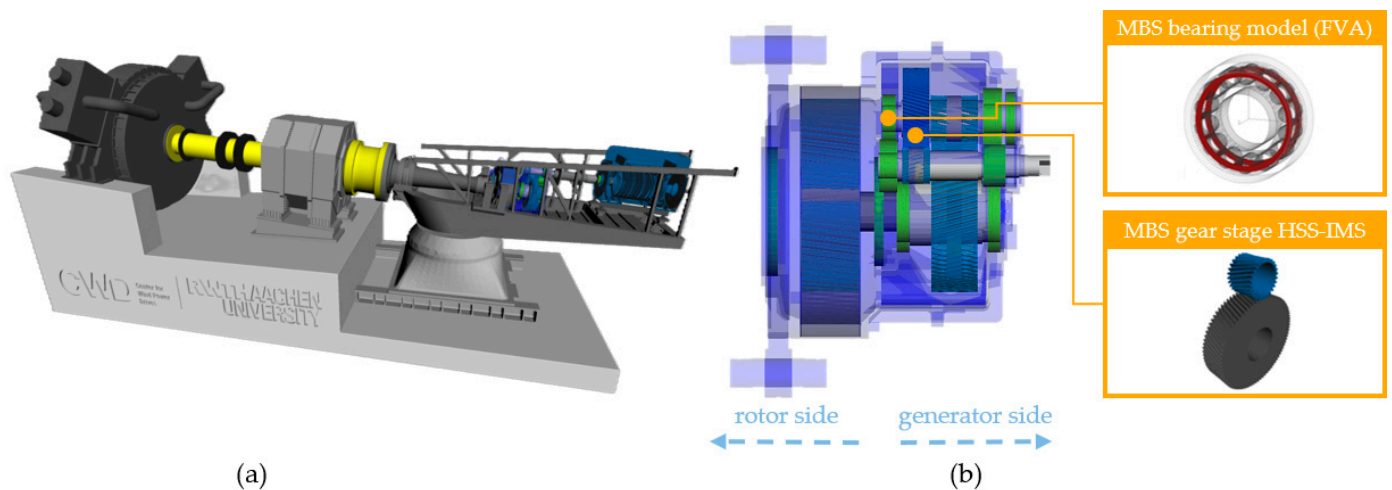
MBS model of the full research nacelle (a) and the gearbox with a detailed bearing and gear stage (b) [3].
